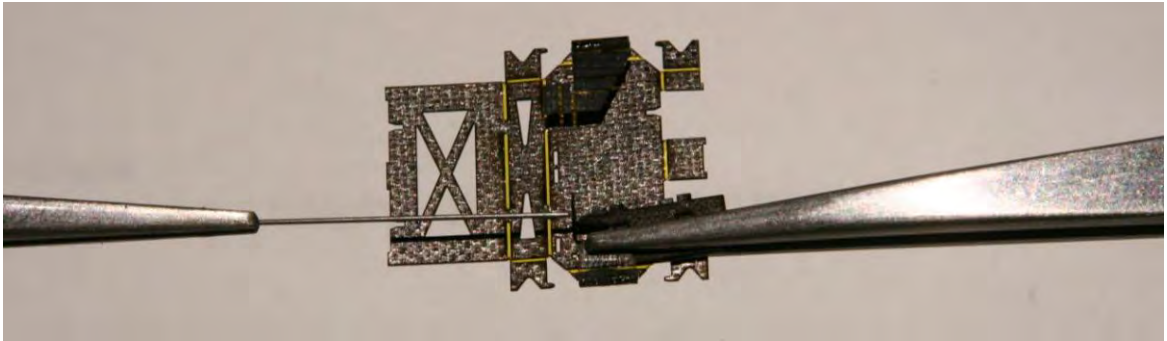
Precision alignment tools folding a version 4 flapping mechanism.
